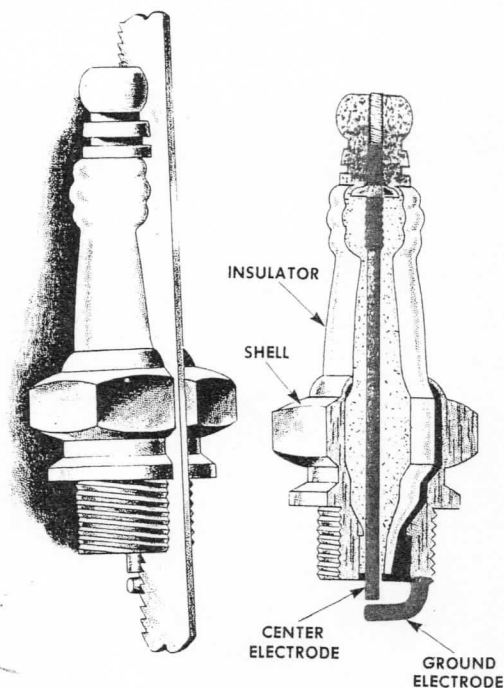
Sectional view of a spark plug. (General Motors Corp.)
